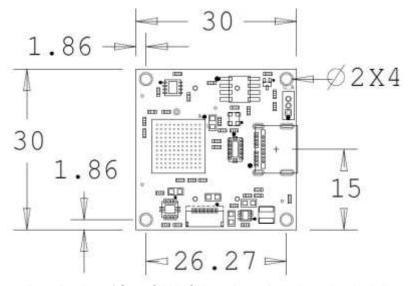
Rear Portion of See3CAM_CU135 Base Board mechanical dimensions
